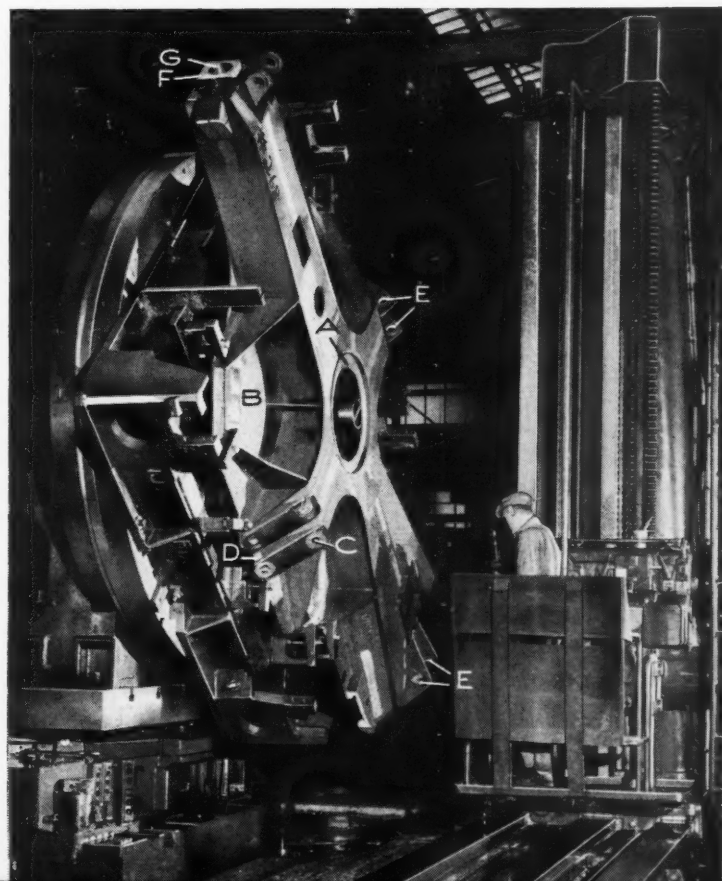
Power-fed rotary table and right-angle milling attachment are employed on a horizontal machine to mill the interrupted periphery of the large steel weldment as shown
